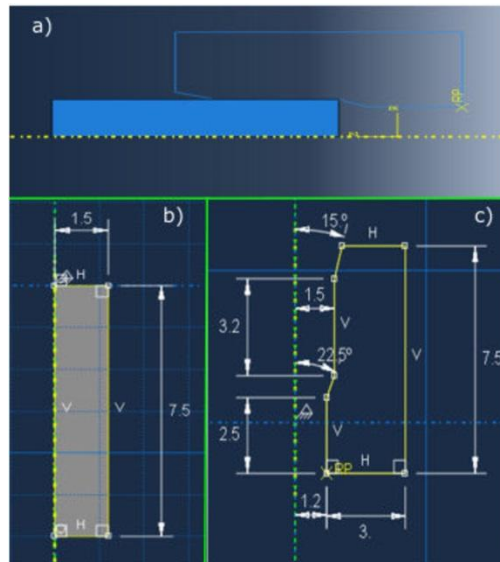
Scheme containing assembly (a) and sketches with dimensions of the parts (b) and (c)
